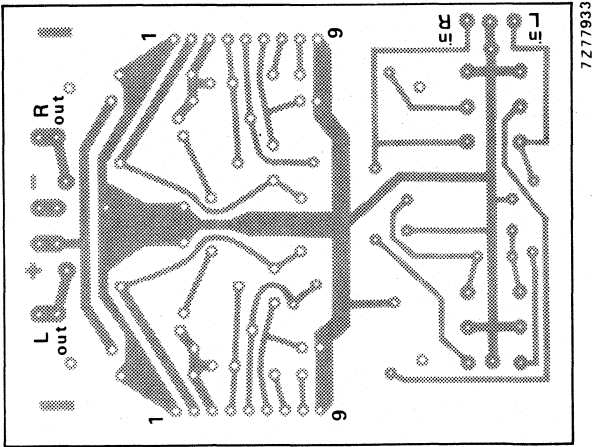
Track side of printed-circuit board used for the circuit of Fig. 12; p.c. board dimensions 83 mm x 65 mm.
